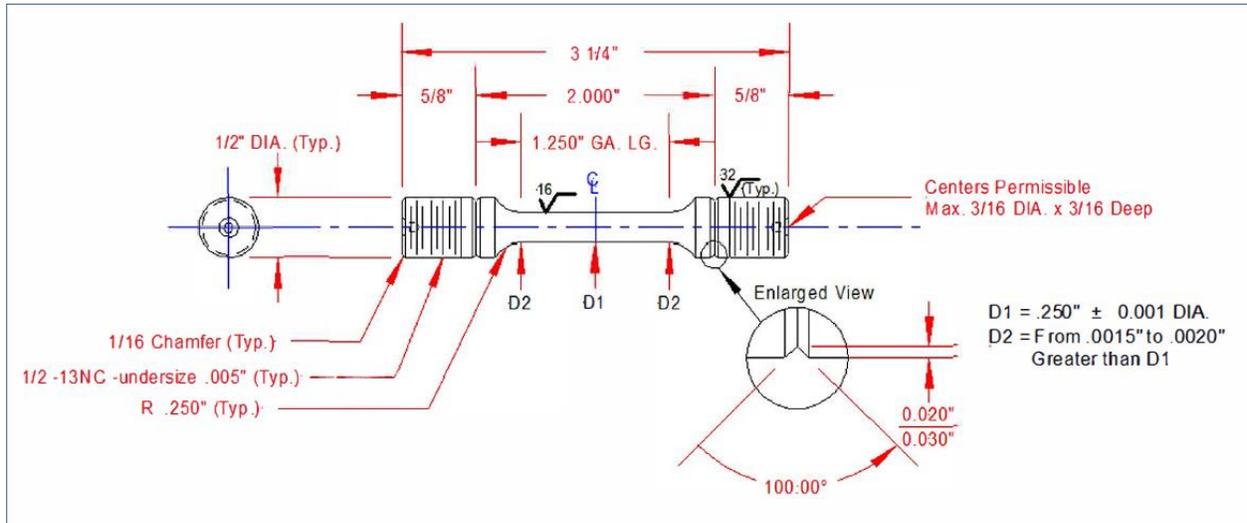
Specimen drawing used in machining of SS 316H specimen.
